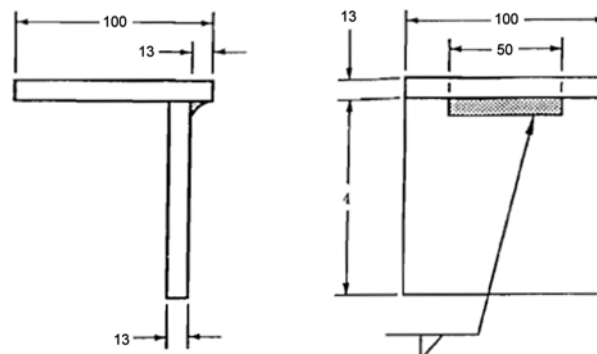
Type and dimension of test assembly for qualification of tack welder
